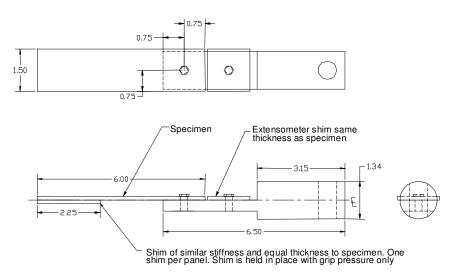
Modified ASTM D5961 (Single Shear Bearing) Specimen and Loading Arrangement
